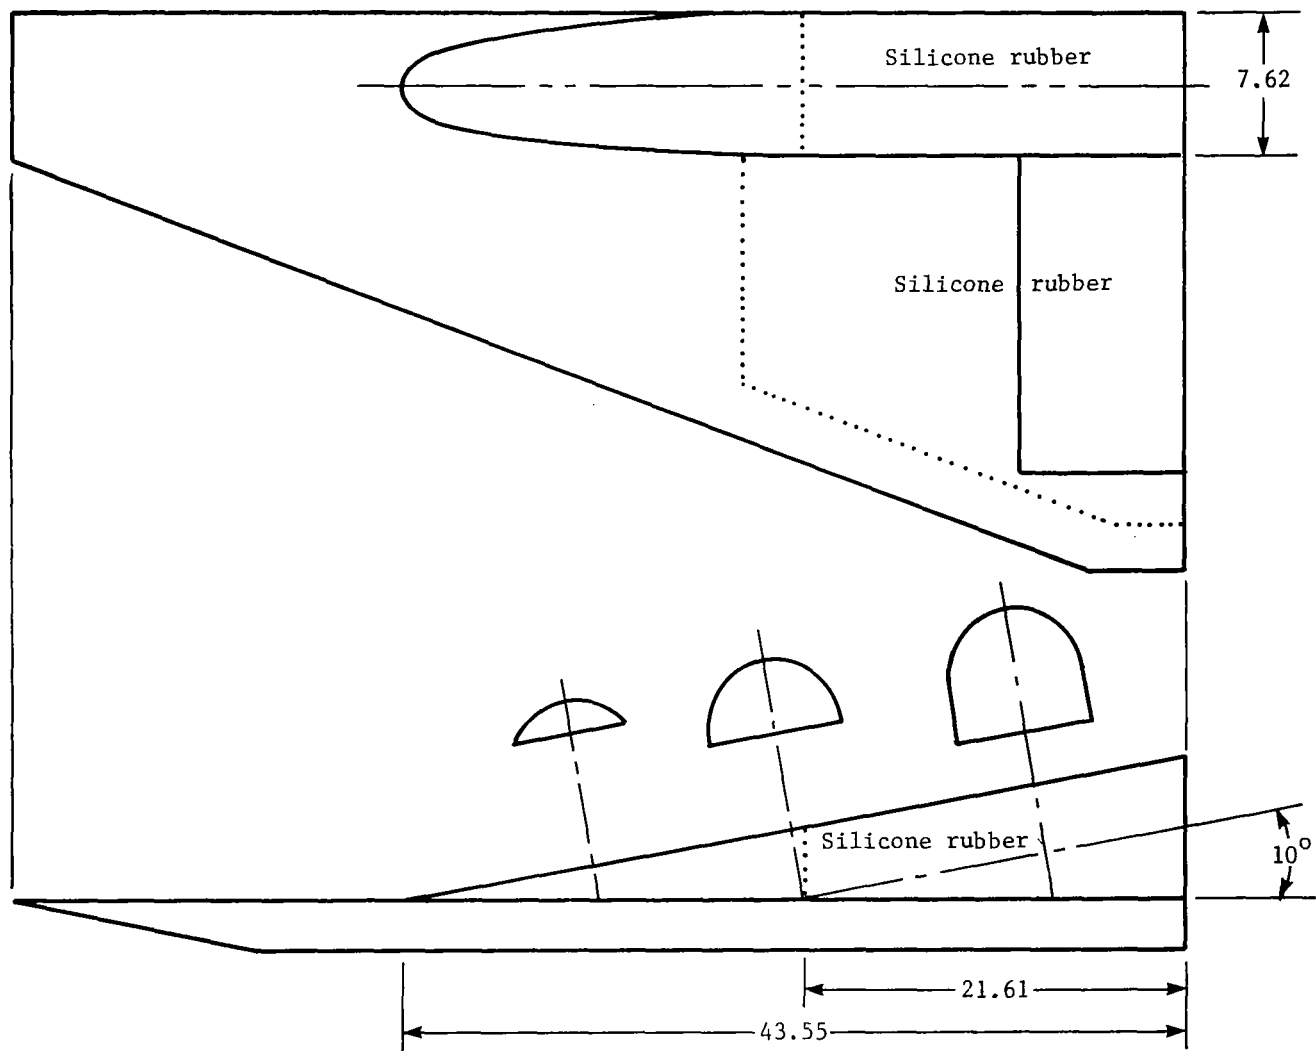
Cylindrical body attached to 70° wing. Linear dimensions are in cm.
